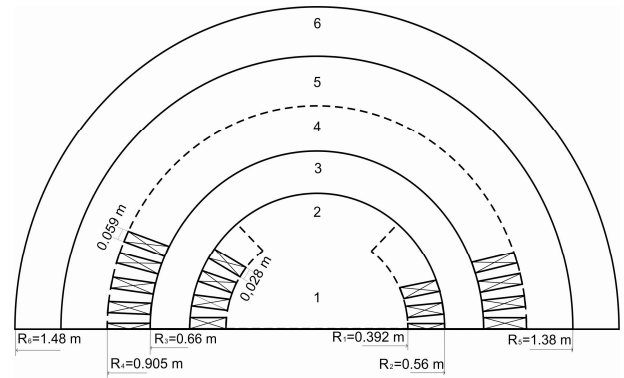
Main geometrical zone dimensions of the turbogenerator cross-section.
